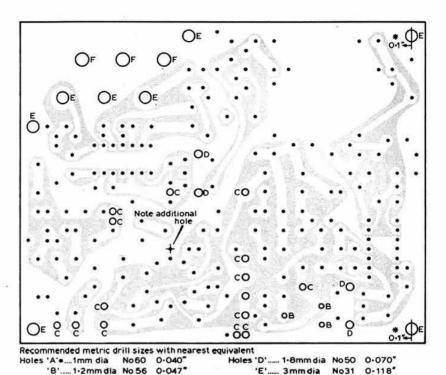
PCB drilling guide. (\*For those building the receiver in a die-cast box, these two mounting holes should be relocated upwards by 0-1in to allow the corners to be removed to clear screw bosses in the box)
